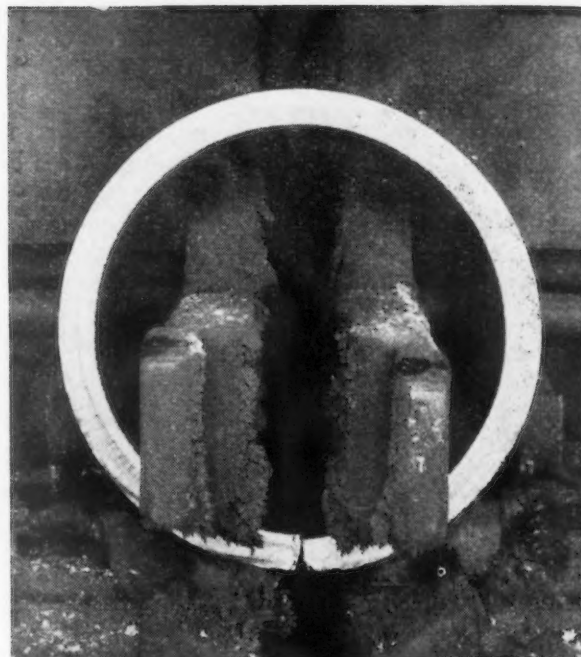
Method of clamping the ends of a steel ring for flash welding. Note the amount of overhang and the gap between the ends.
